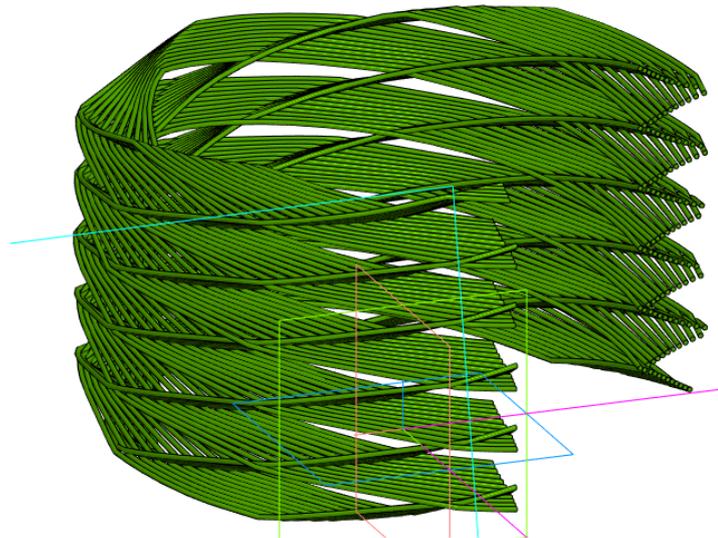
Computer model of thread winding with a spiral structure, gear ratio $u = \frac{266}{121}$
